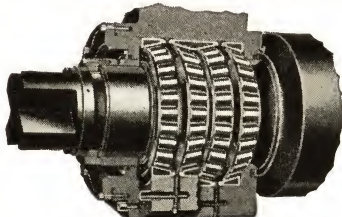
Timken Heavy Duty Roll Neck Bearing
